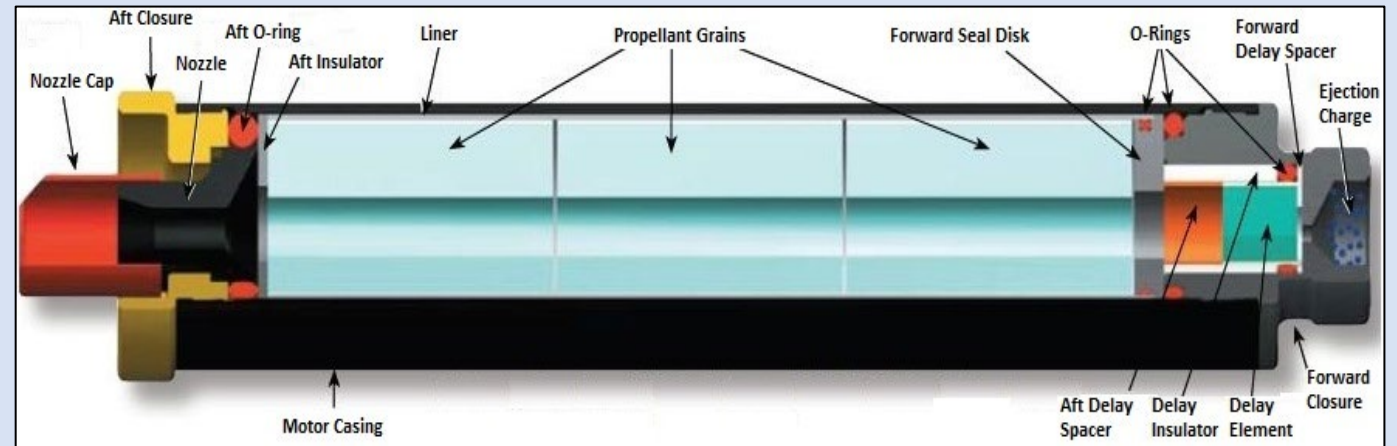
Cutaway Drawing of Typical Assembled RMS-Plus Motor
